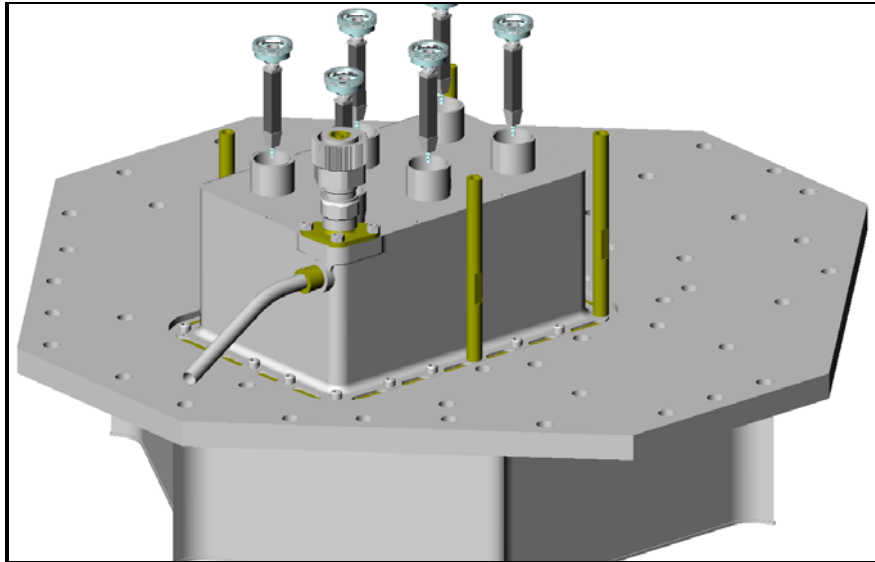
Breadboard Bandpass Filter with Piezoelectrics (Exploded View)
